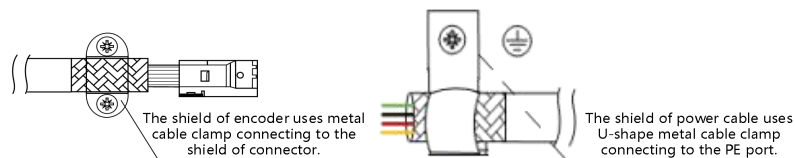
FD1X5 driver side power line/encoder line shield layer 1\* processing mode
